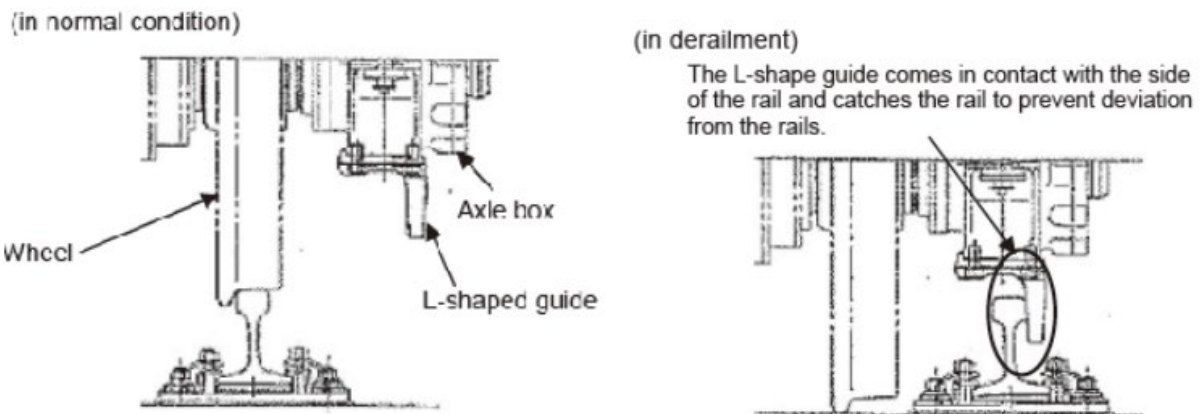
Guard rail protection (Abtahi, 2013)
